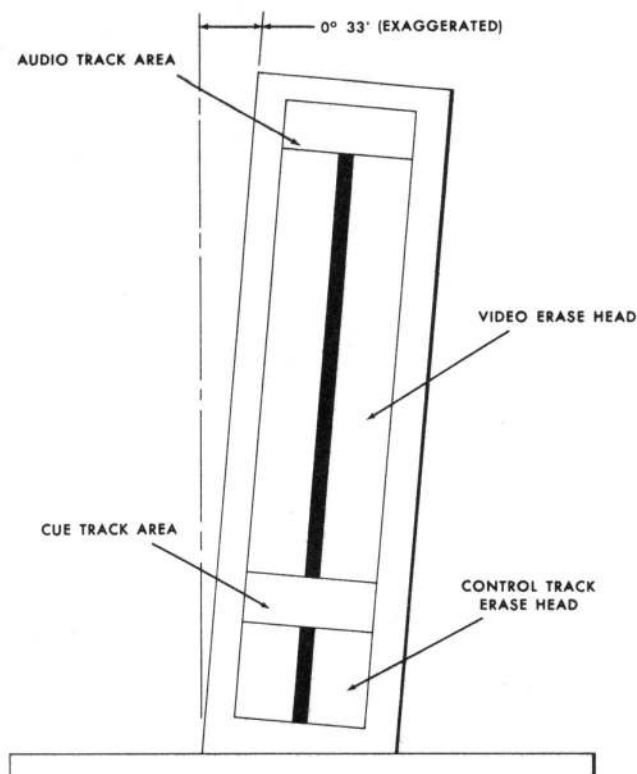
DETAIL OF ERASE HEAD ASSEMBLY
